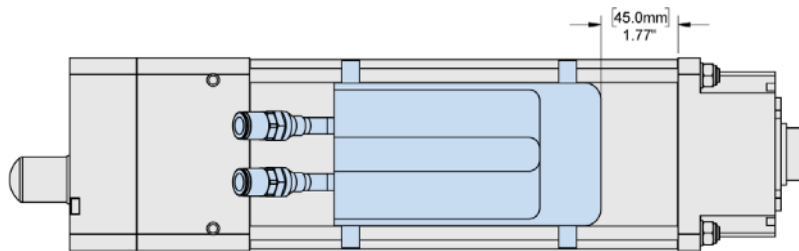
Attach water cooling option 45 mm (1.77") from the head on any side of the ServoWeld actuator
